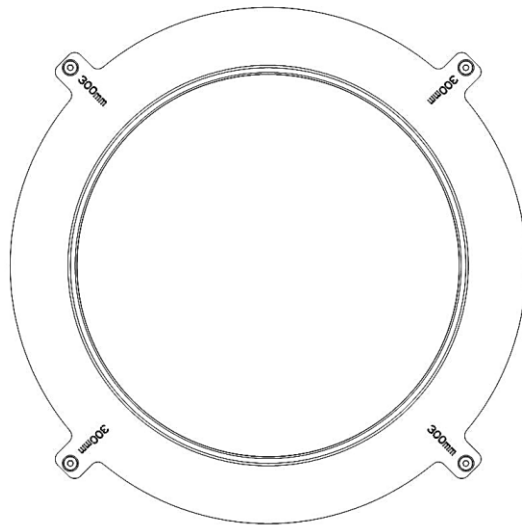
Apogee™ Mechanical Debonder Chuck Assembly
